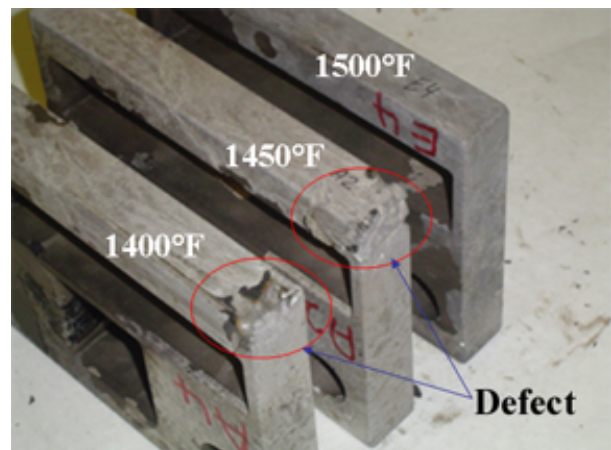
The cold shot defect at the corner of a GM window casting. The corner was the region last filled during mold filling. The defect can be reduced and finally eliminated by increasing the pouring temperature.
